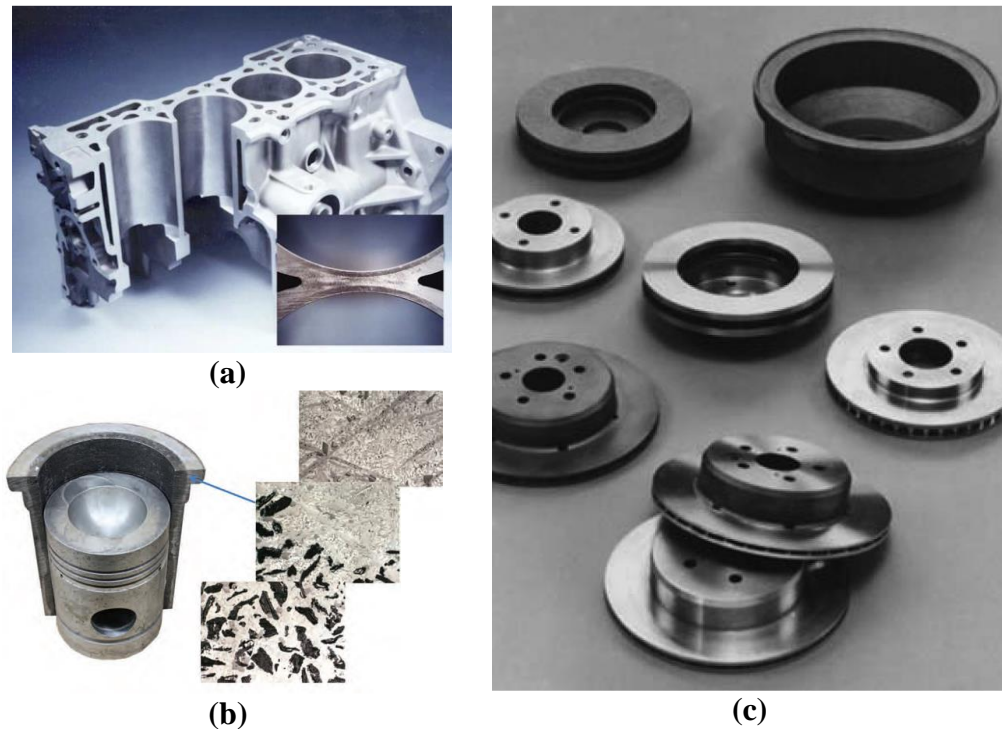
(a) Engine block with MMC cylinder liner (b) Toyota diesel piston with particle reinforcement (c) MMC brake drums and rotors [1,4,20].
